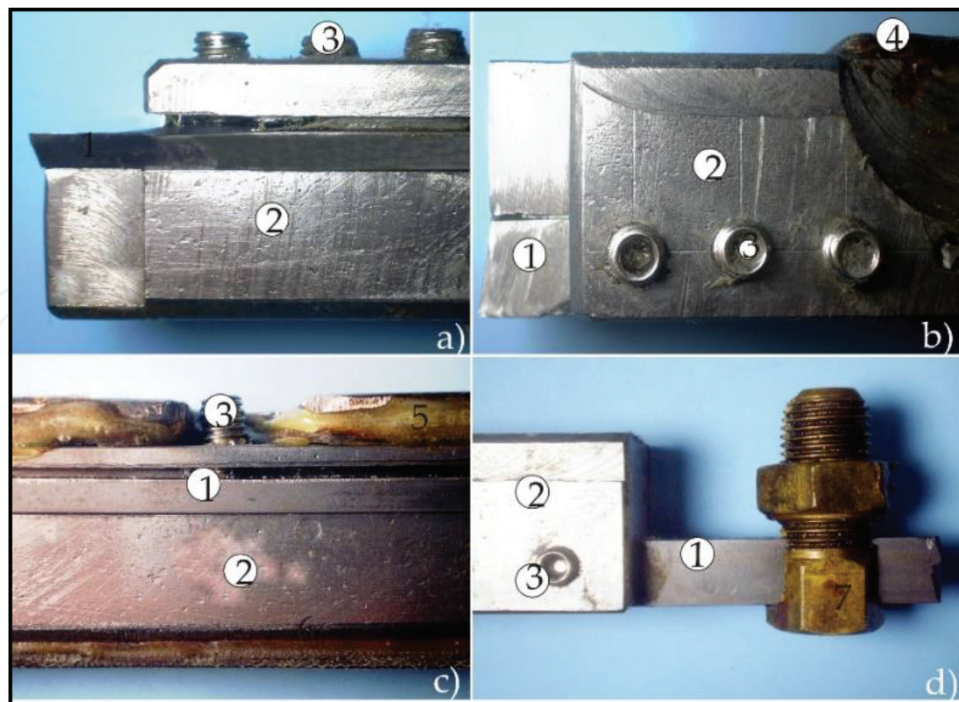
Photos of the cutting tool: (a) lateral view; (b) superior view; (c) lateral view of the mid of the tool holder; (d) superior view of the opposite end.
